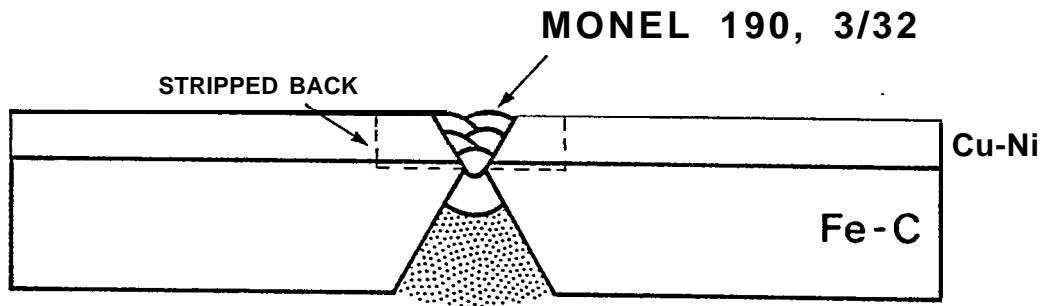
Graphical illustration of the welding of Cu/Ni. clad steel.
